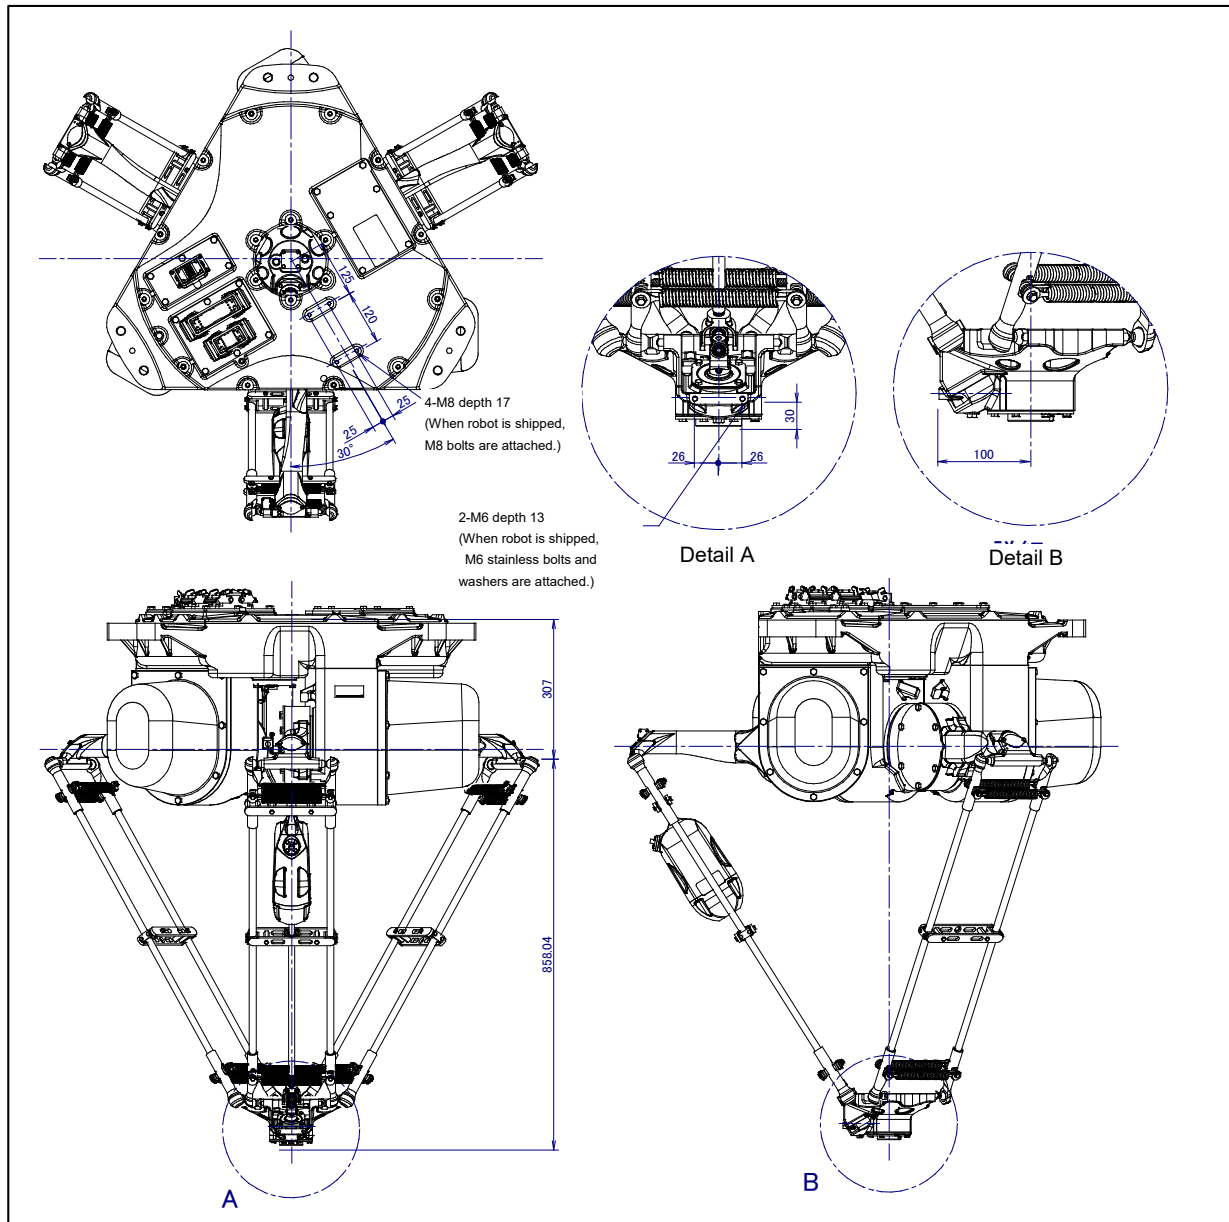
(c) Equipment mounting faces (M-3iA/6S (A05B-1523-B203))
